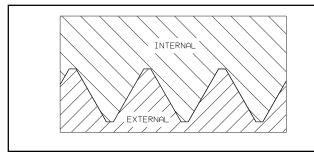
NPTF — Wrench Tight-Crest to Root and Flank Contact
